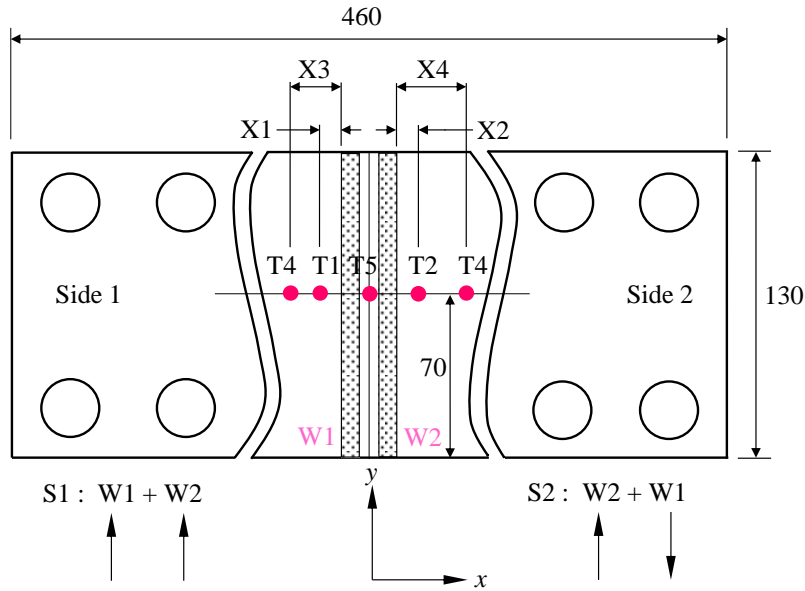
The location of the thermocouples attached to the top and bottom sides of the fillet welded specimens in Publication II. The welding direction was in +y direction, and all the dimensions are in mm. T1–T4 are thermocouples on the top side, and T5 was attached to the bottom side. X1–X4 are the distances of the thermocouples from the weld toe, which were measured post welding, and will be discussed in the results and discussion section. S1 and S2 show the order of the welding passes.
